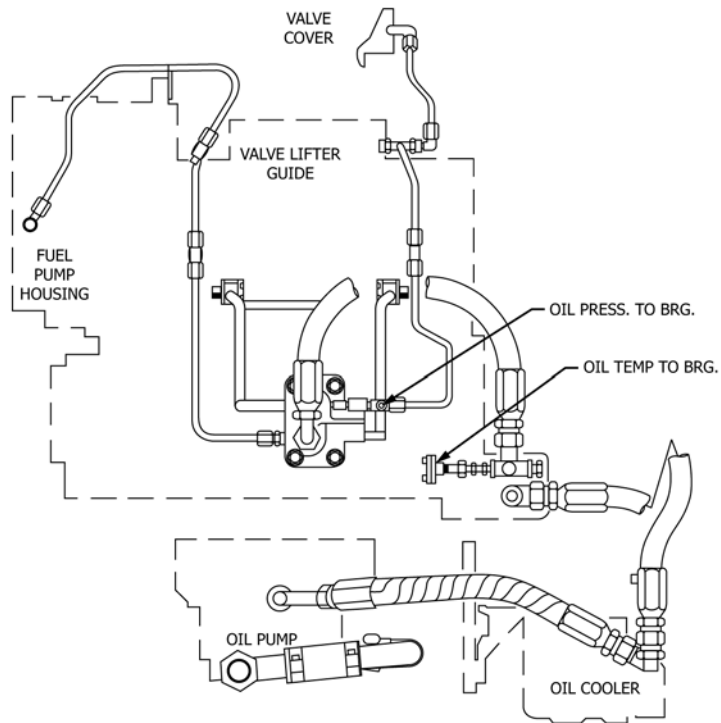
1Y580 Engine Oil Lines Group - Part 1
